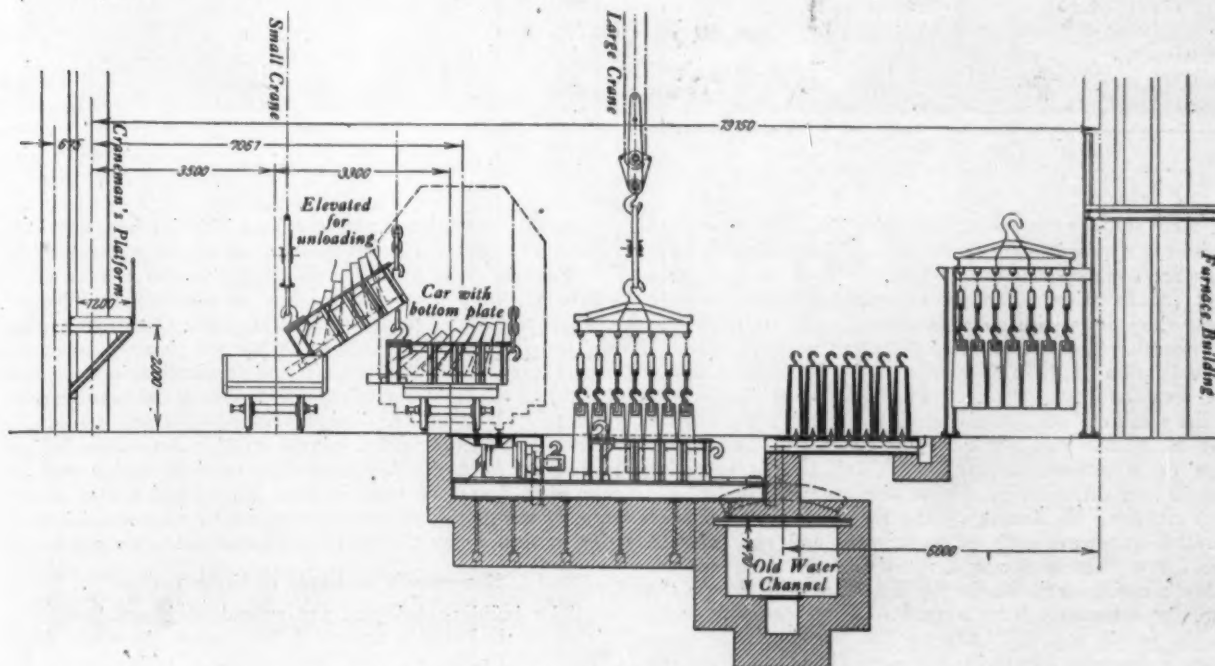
Cross Section of Casting Pit at Resicza, Austria-Hungary
